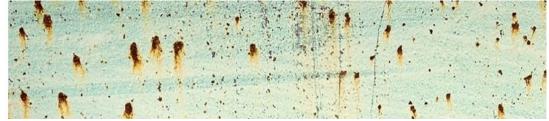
B. Pitting corrosion in stainless steel sheet.
